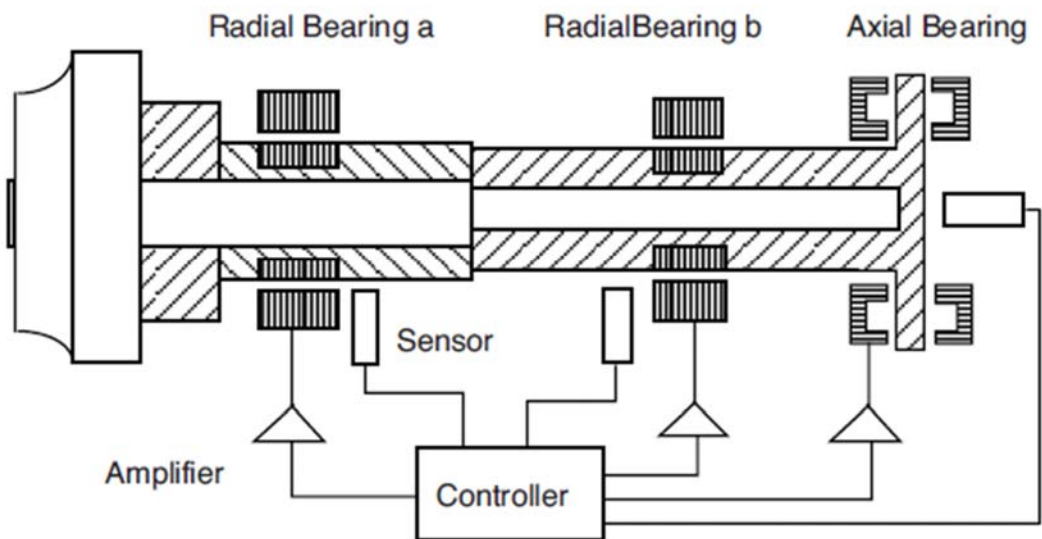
Planar section of rotor hovering in magnetic bearing (*Bleuler, et al., 2009*)
